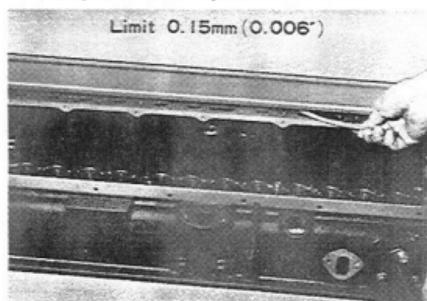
Cylinder Block Surface Flatness Inspection V4349
